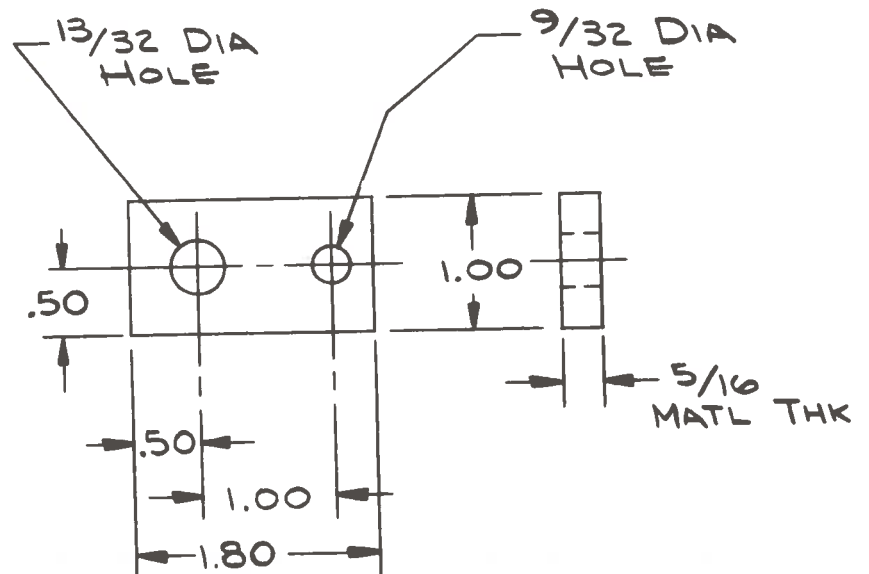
LEFT & RIGHT REAR SIDE MOUNTING ADAPTER BLOCKS
